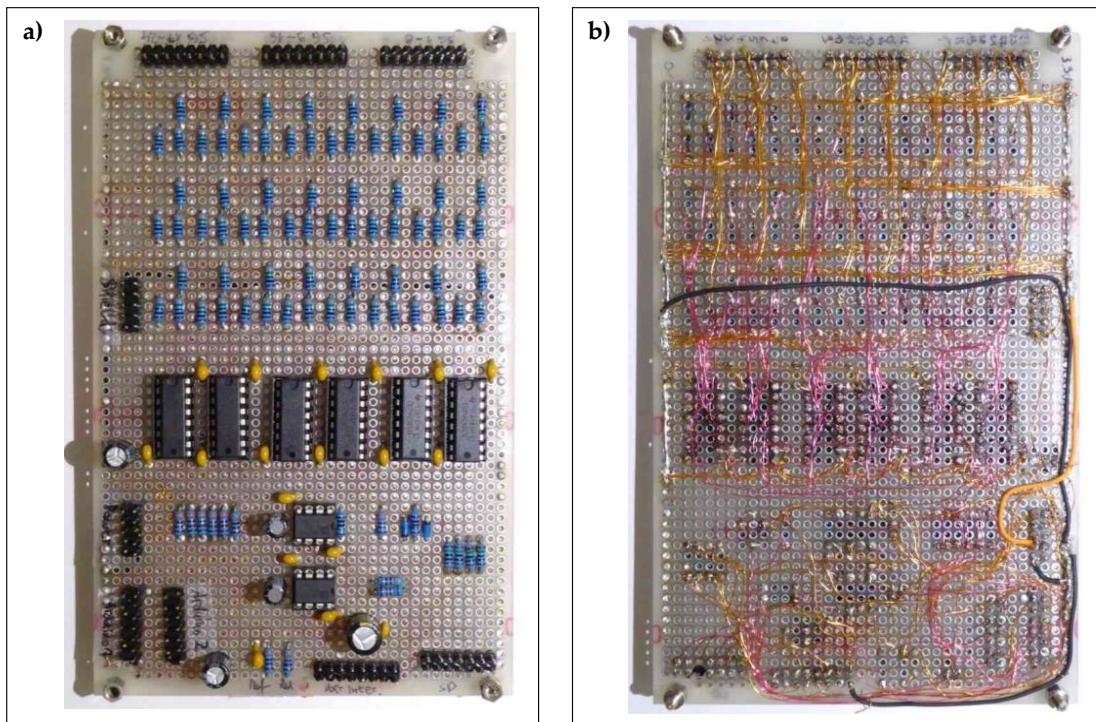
Board of the signal conditioning unit: a) Top side, b) Bottom side
